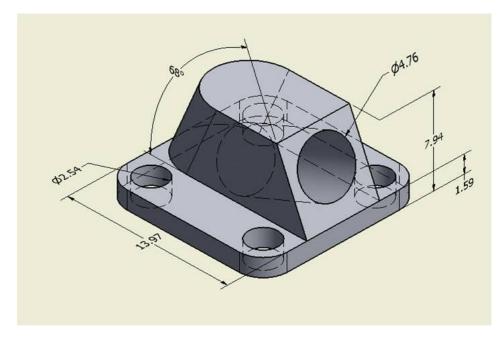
32 Automated annotation Annotation using automated CAD tools. Picture (PLM Engineering).
